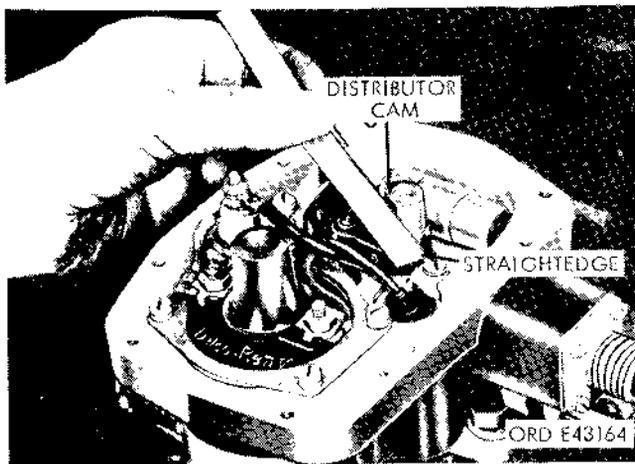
Positioning distributor breaker cam for distributor installation.
